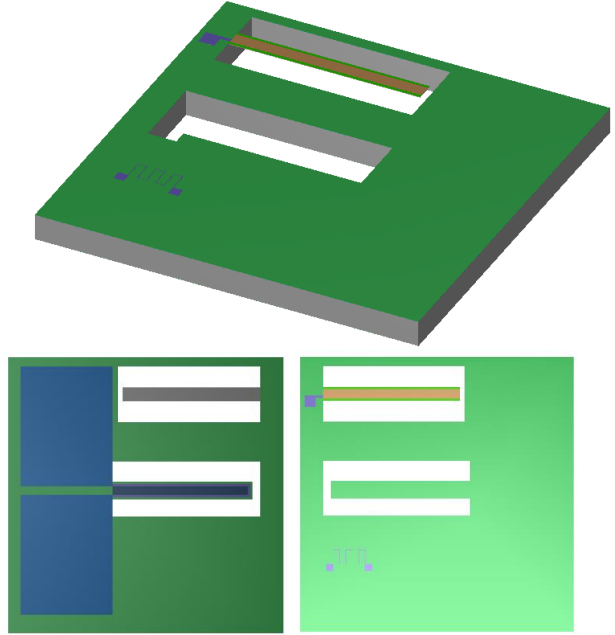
3D model (top), bottom view (bottom left), and top view (bottom right) of the final design.
